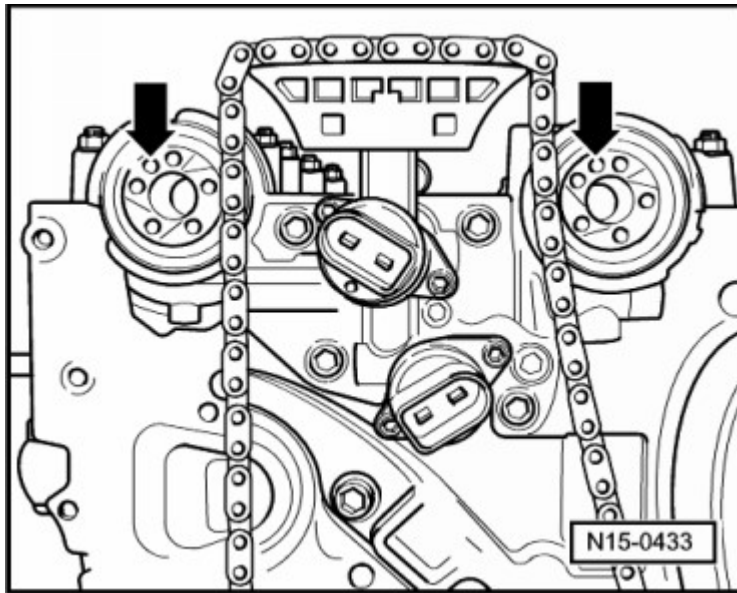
Identifying Camshaft Timing Adjusters Positioned On The Camshaft Mountings
